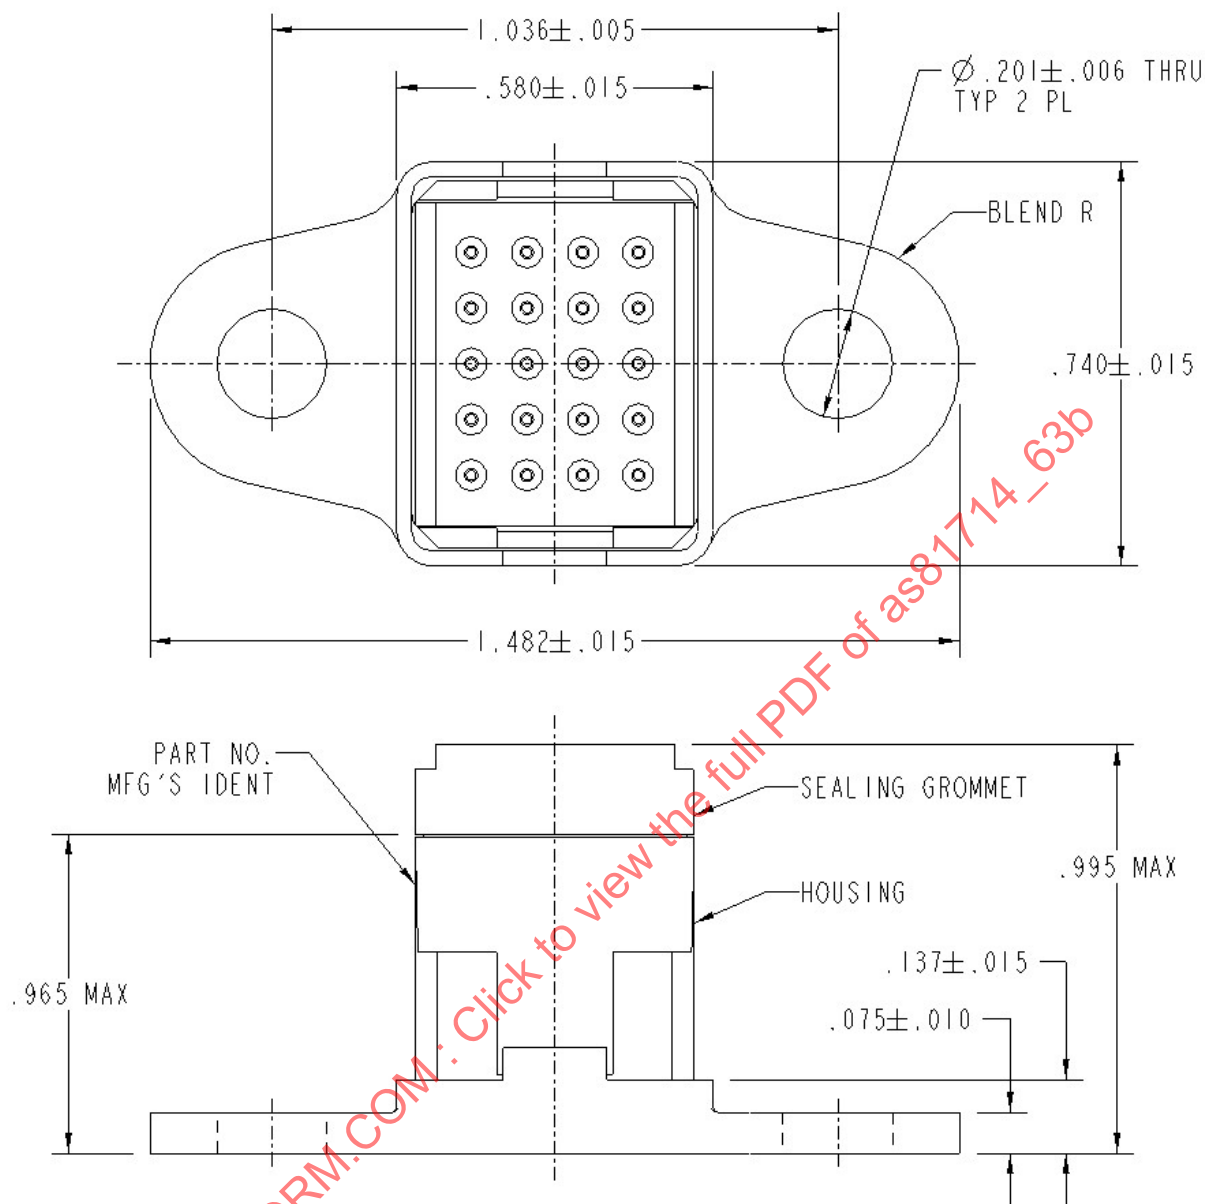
FLANGE MOUNTING TYPE F (ALL EXCEPT BLOCK SIZE 12)
